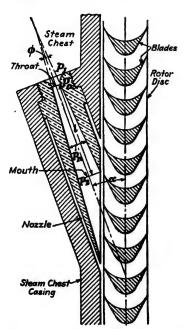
Diverging nozzle and blades for an impulse turbine.
